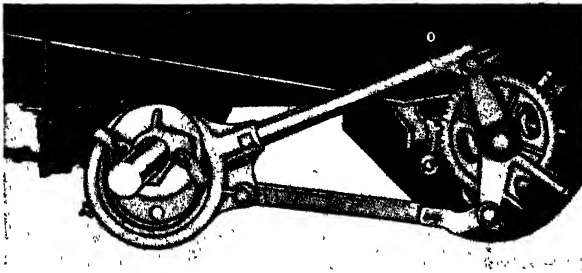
Apron drive using eccentric device to operate the ratchets which slowly revolve the ratchet gear and thus move the apron over the box bottom at the rate desired.
